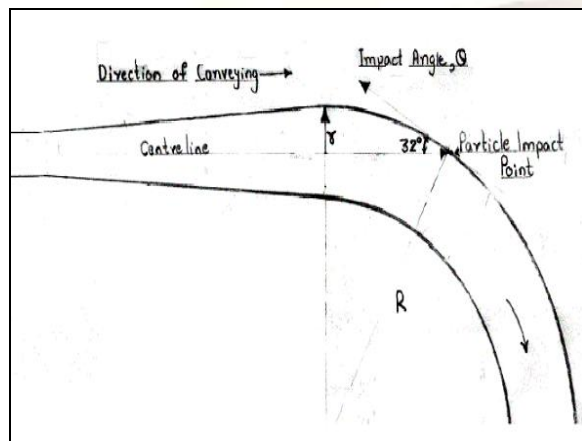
Dimensional Sketch of 102 mm Bore Bend
